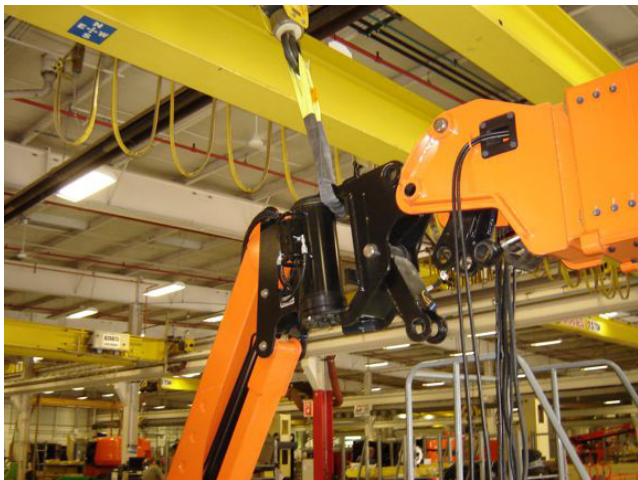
Main Boom Assembly - Sheet 7 of 7
